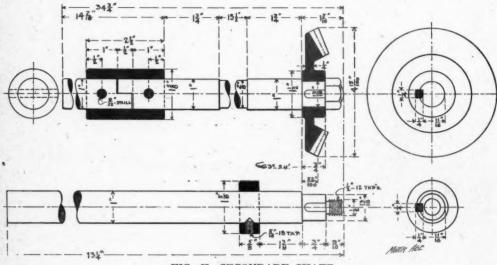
SECONDARY SHAFT. 1—Complete.
